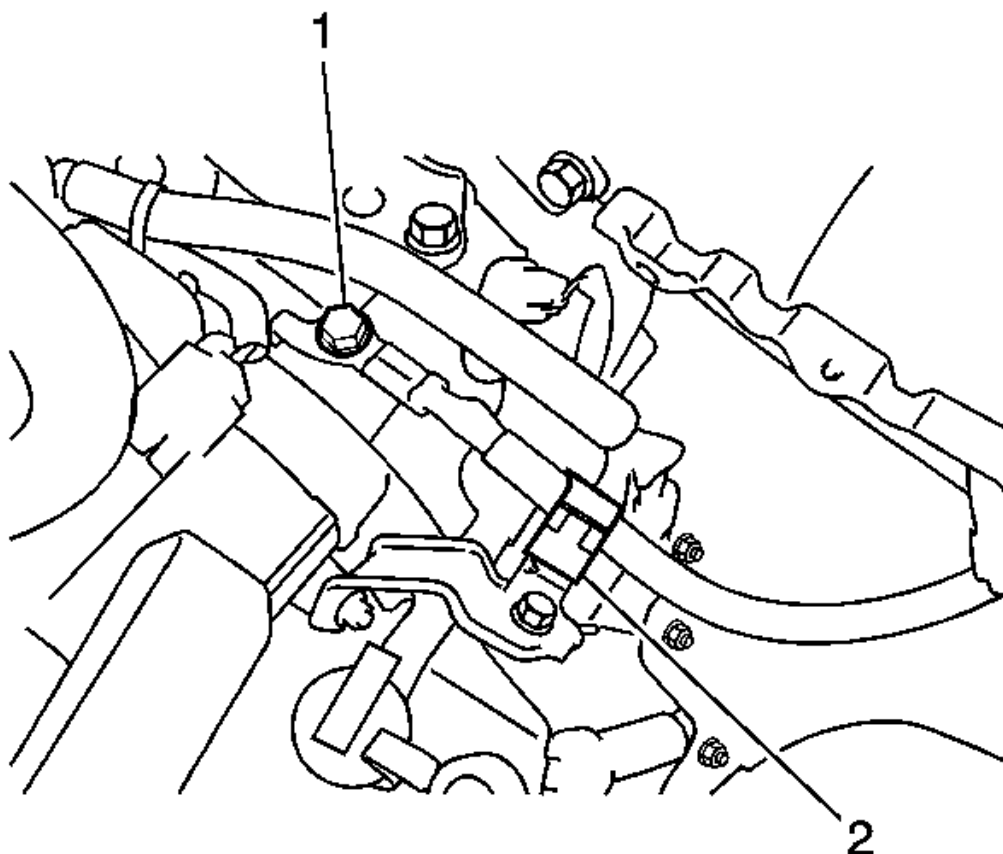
Identifying Clamp & Ground Cable - Automatic Transaxle
